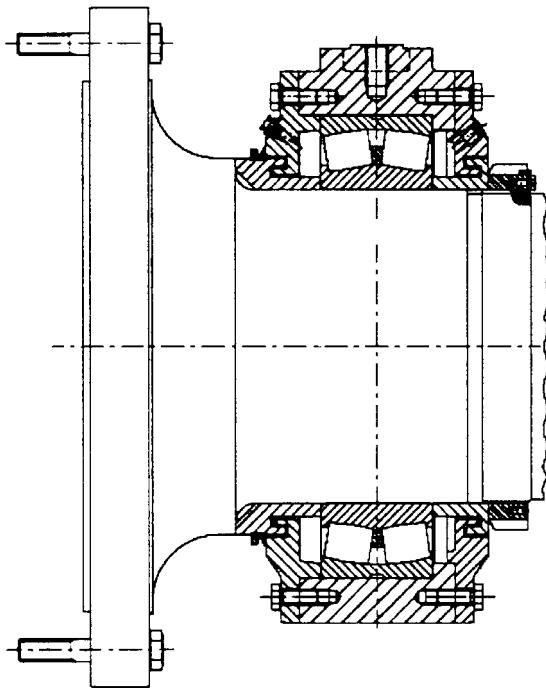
Section through a swivel-joint roller bearing with special housing for wind turbines [8] (SKF)
